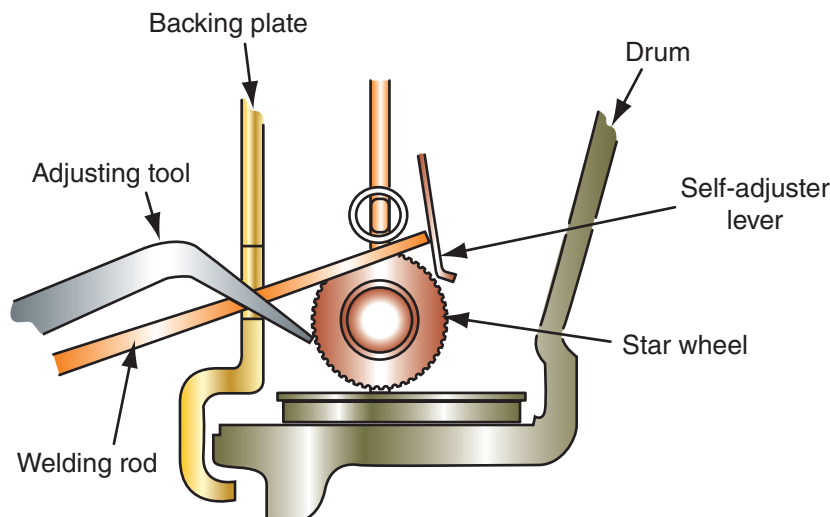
Use a heavy piece of wire to move the adjusting lever away from the star wheel, then rotate the star wheel to move the brake shoe away from the drum before removing the drum.
